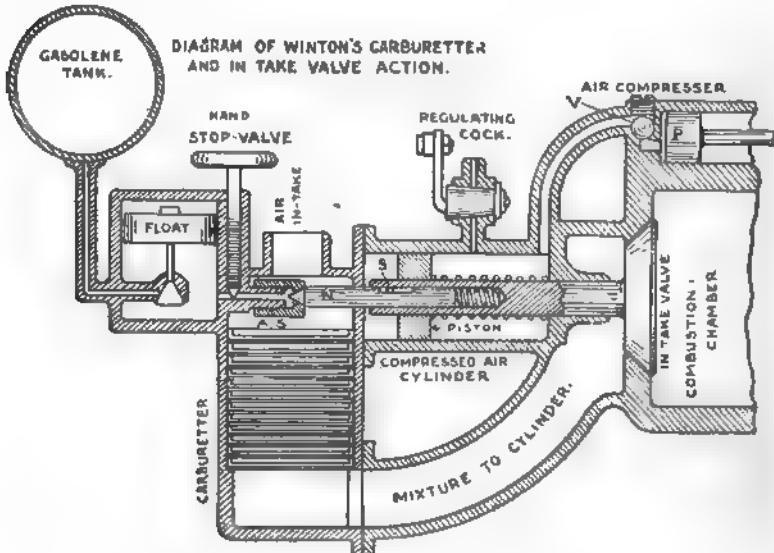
Diagrammatic Sketch of Winton's Carburetter and Intake Valve Action, as applied to an Horizontal Cylinder Engine.
